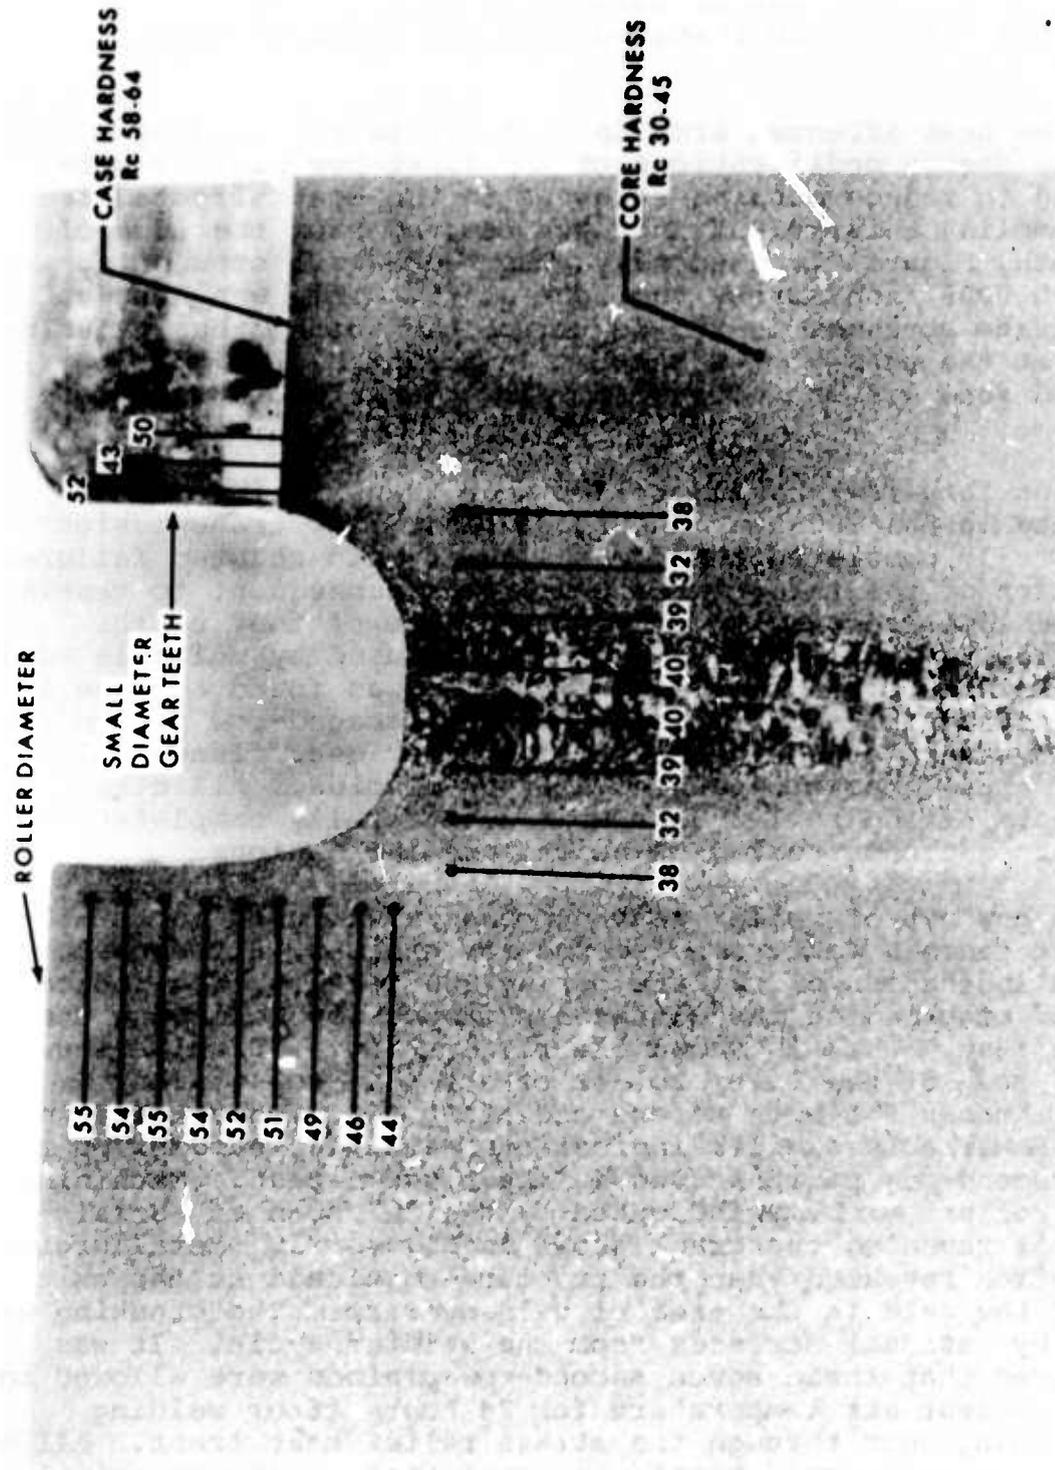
Hardness Readings, Vicinity of First-Row Pinion Tooth Fracture Origin.
